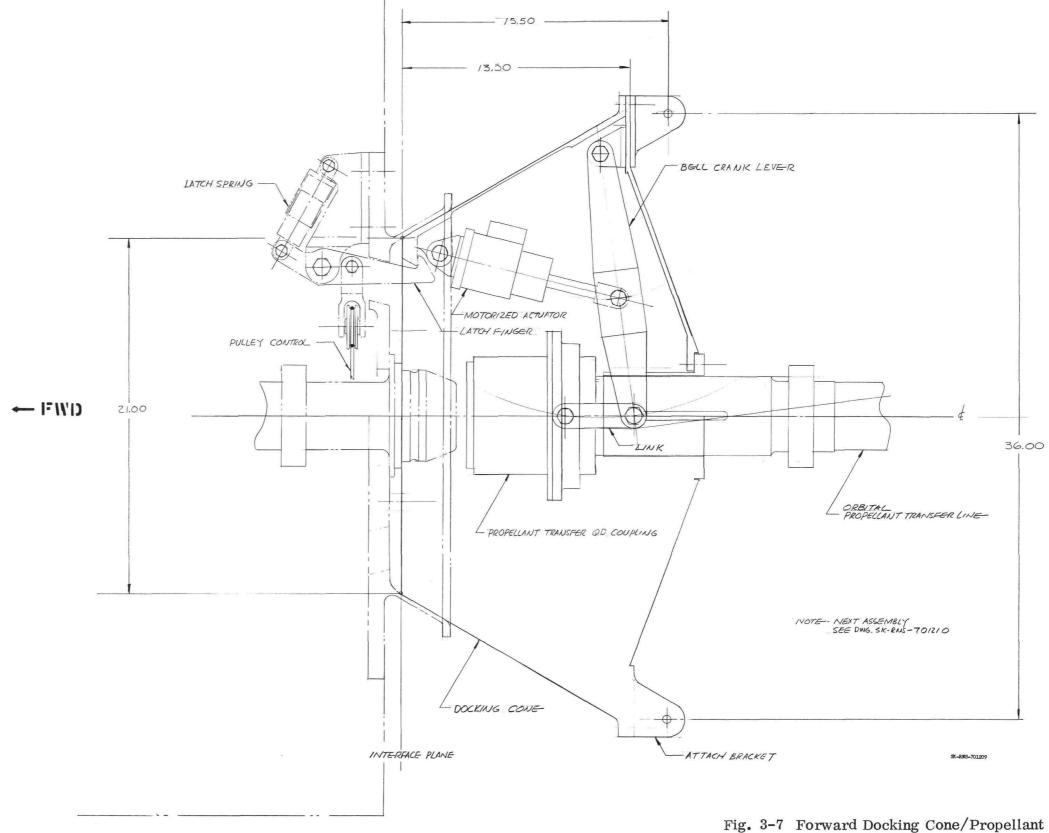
Forward Docking Cone/Propellant Transfer Assembly
